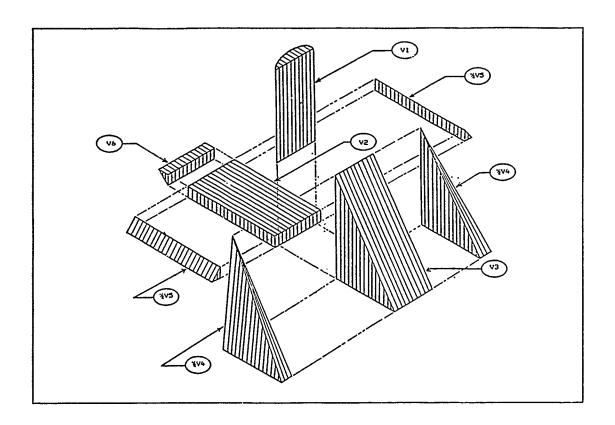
LCC Solder Joint Linear Approximation Exploded View.
